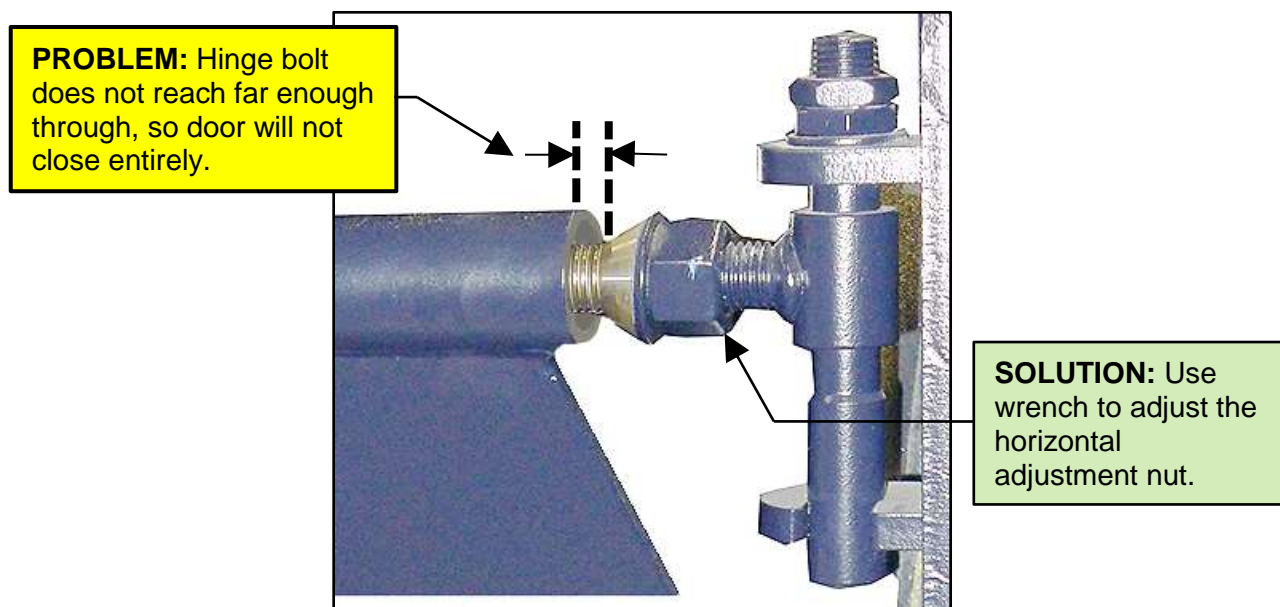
Adjusting Horizontal Adjustment Nut on Hinge
